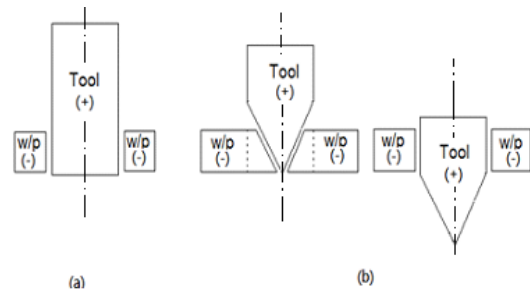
Material removal using (a) flat tool (b) using tapered tool
